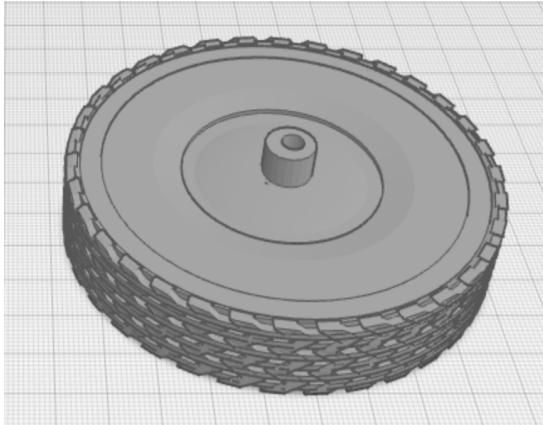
, Final design sketches; Made to help translate rough sketches into to-scale drawings that could be implemented and 3D printed (Team 5, 2023)
